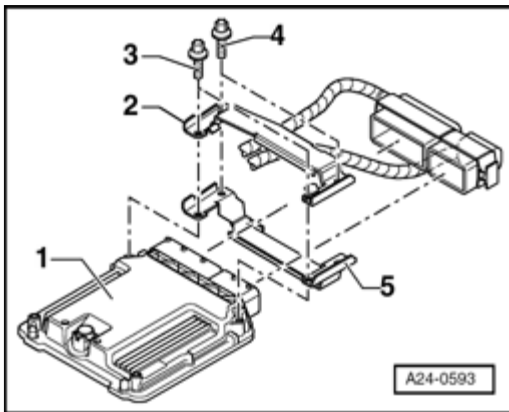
Removing Protective Housing From Engine Control Module (ECM) J623
